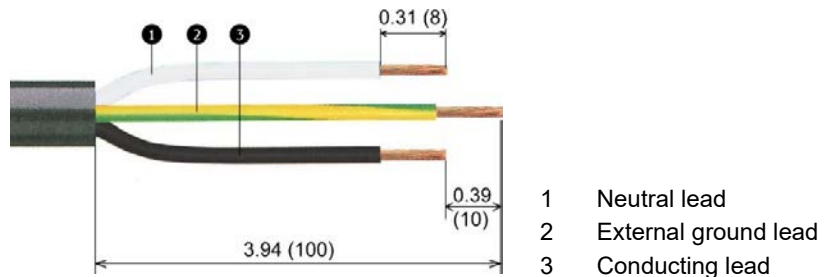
Removing the insulation (Dimensions in inch and (mm))
